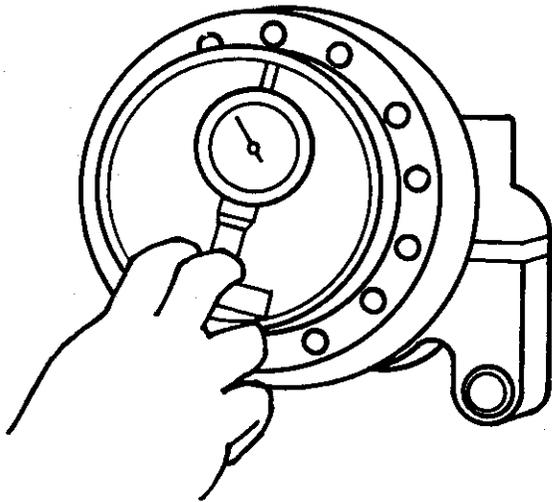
Checking cylinder bore with a dial indicator.
